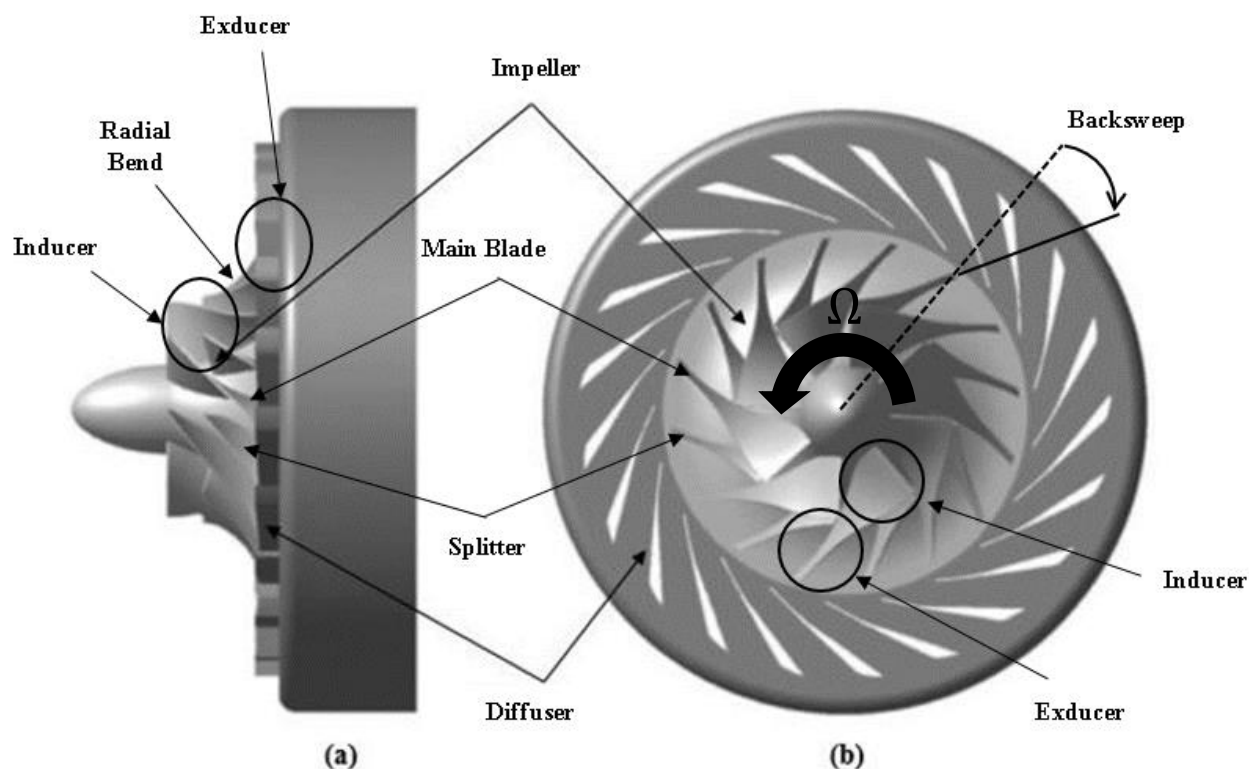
Centrifugal compressor components, (a) Side view, (b) Front View [2]
